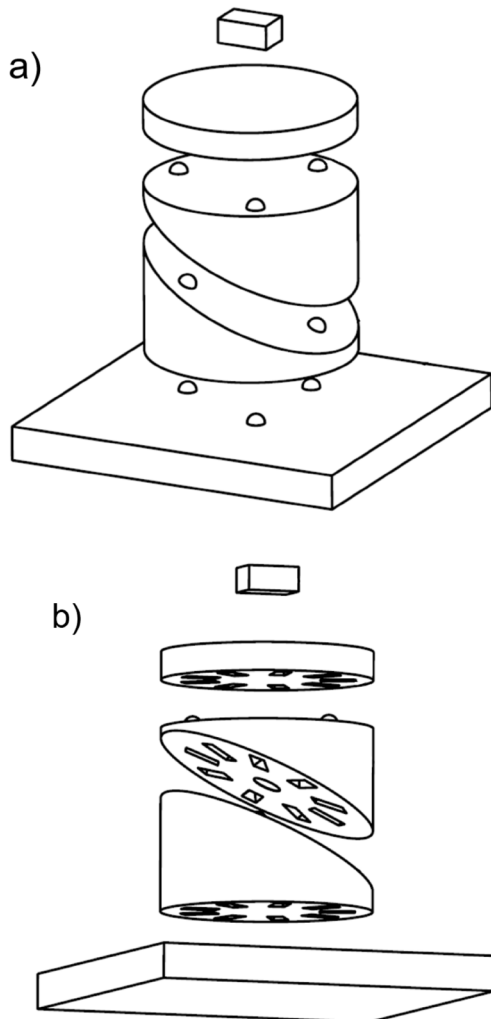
Schematic line drawing of the fixture as seen from two different viewing angles: a) Top isometric view; b) Bottom isometric view
